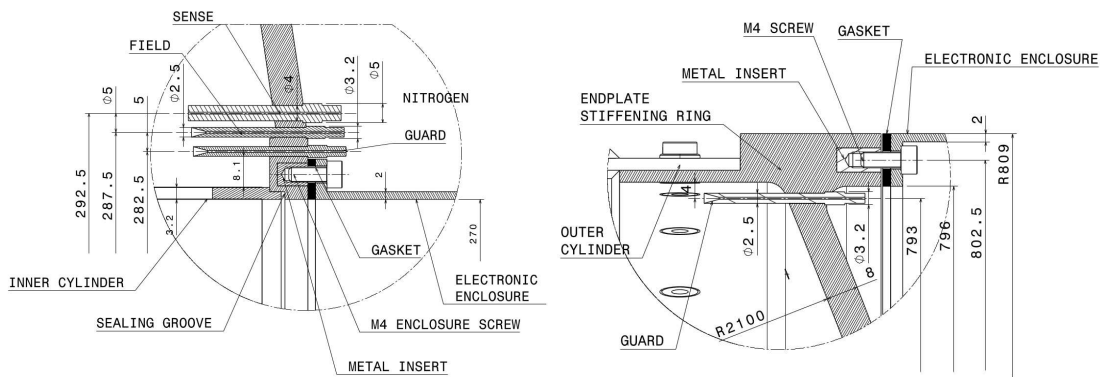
Left: coupling of the DCH inner cylinder to the endplate; right: Detail of the outer flange of the DCH endplates.
